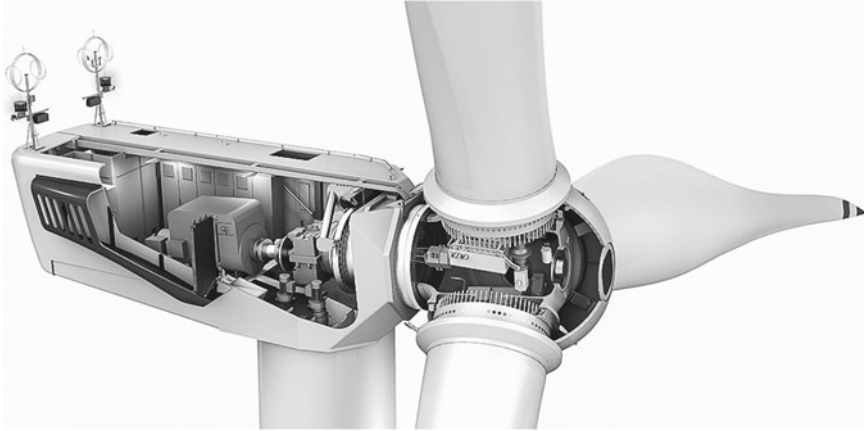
Drivetrain with moment bearing FWT 2500 – formerly Fuhrländer [FWT]
